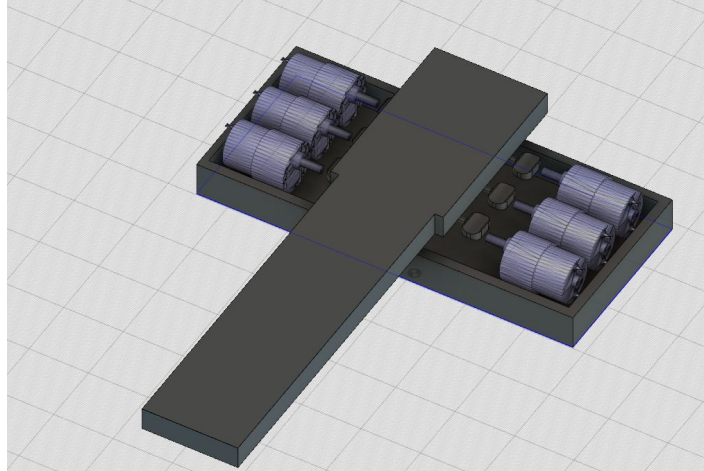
Fusion360 Mockup of a 6-motor Tuner Design with ROB-12472 Motors
